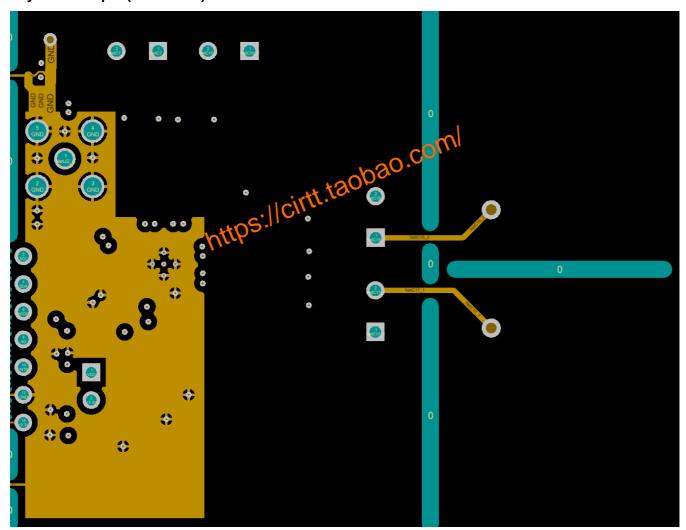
Example PCB Layout: Mid-layer 1 (GND)
